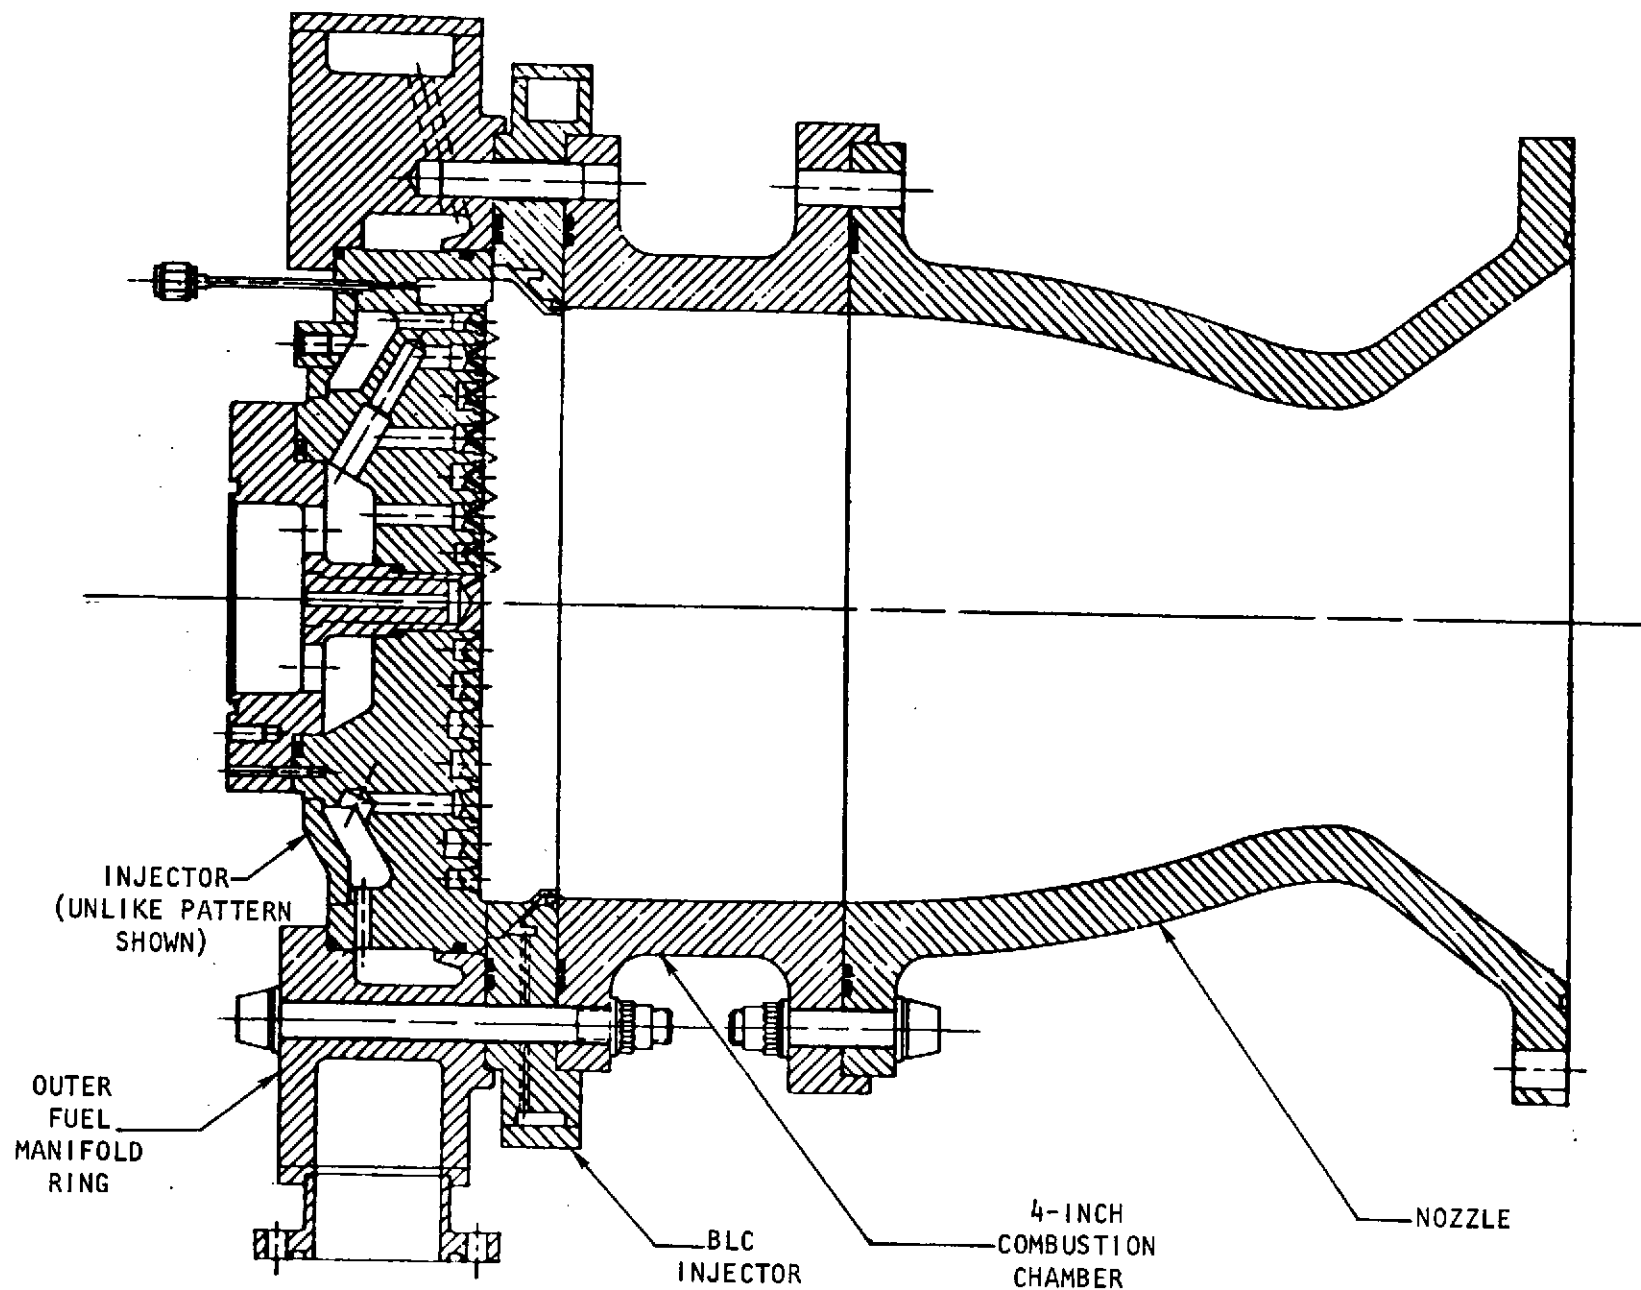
Thrust Chamber Assembly Used for Heated Fuel Acoustic Cavity Testing
